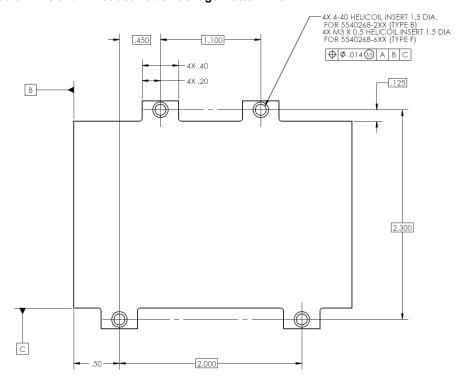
Radial Pins and Threaded Tabs Package Bottom View
